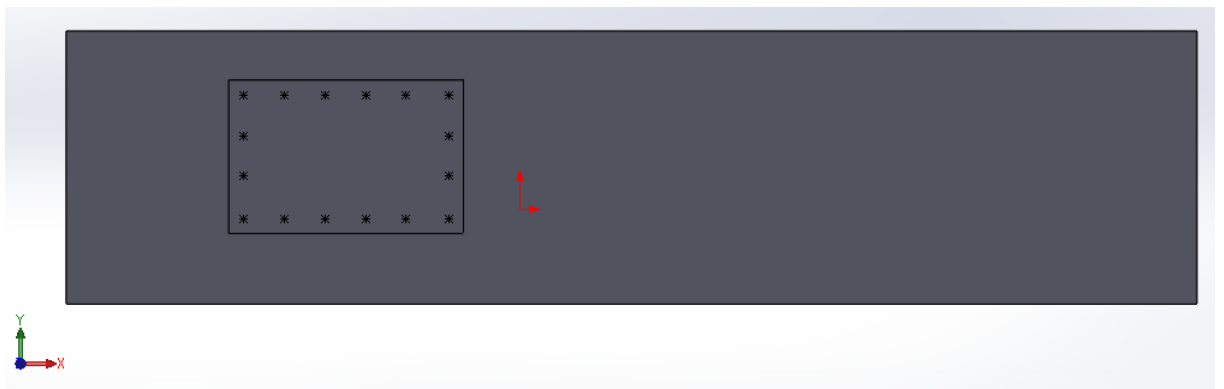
Assembly Doubler & 1 Row Fasteners for 3" x 1.5" Cutout
